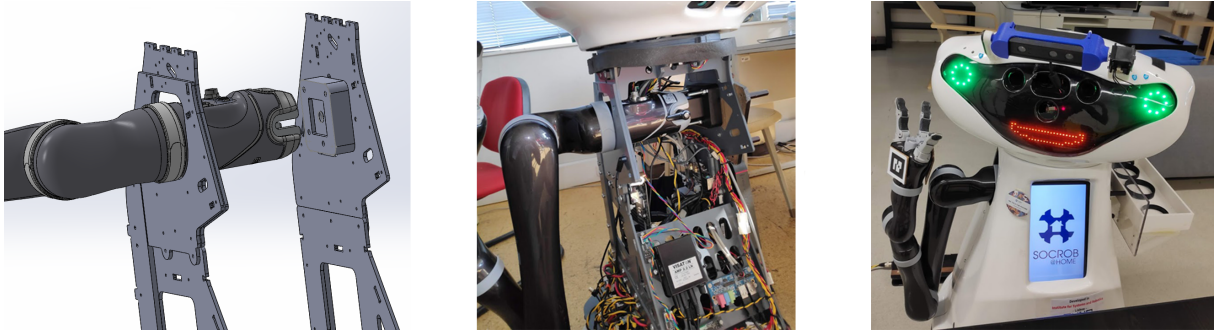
Arm assembly with modified side-plate and new mounting fixture. Left to right: SolidWorks assembly, arm mounted inside the robot, final result.
